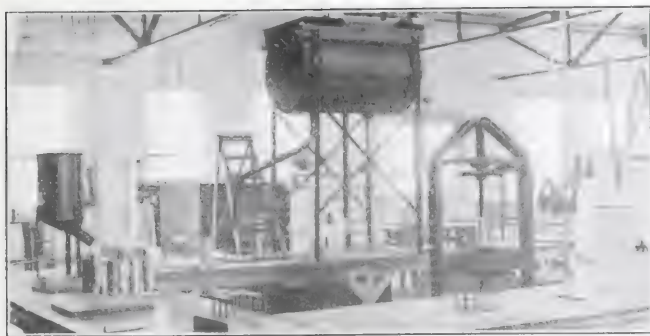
COUNTING EQUIPMENT SHOWING BULLET HOPPER, POWDER TANK, LOADING PRESS AND RESIN TRENCH.
